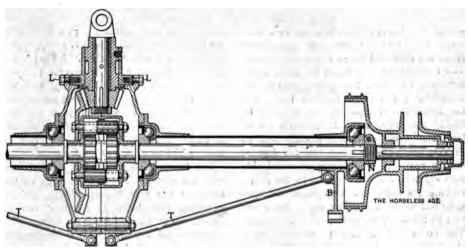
REAR AXLE AND BEVEL GEAR DRIVE.
